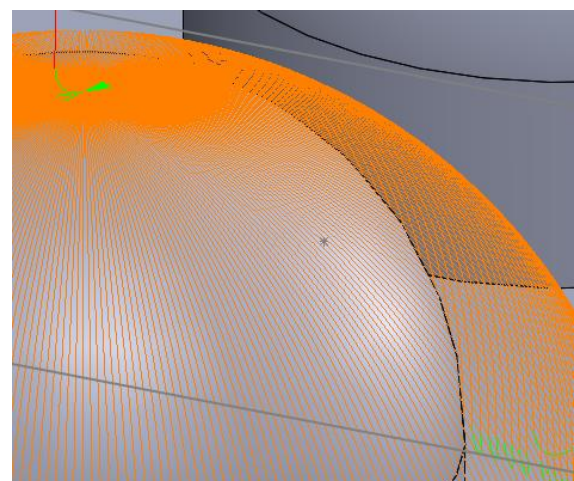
Toolpaths for 3-axis milling with employed radial strategy
